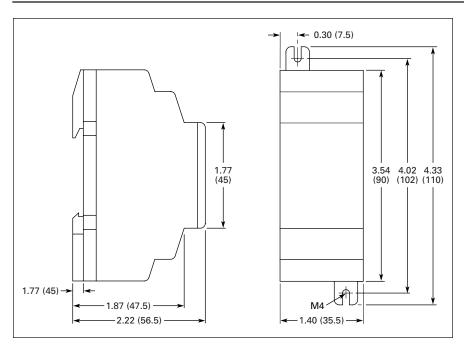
EZ256-HCI Dimensions in Inches (mm)
